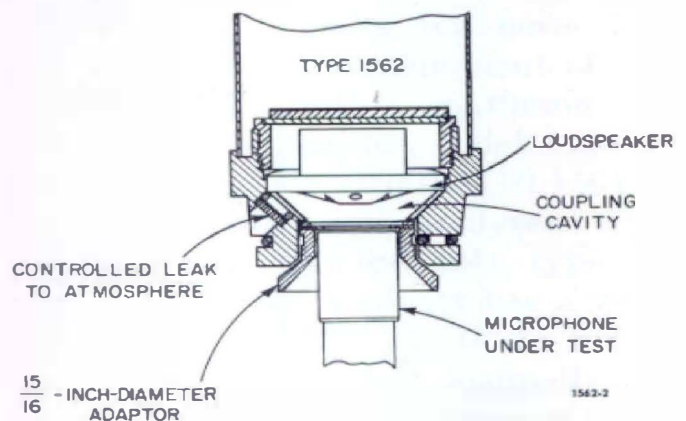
Cross-section drawing of calibrator and adaptor in place on 15/16-inch-diameter microphone.
